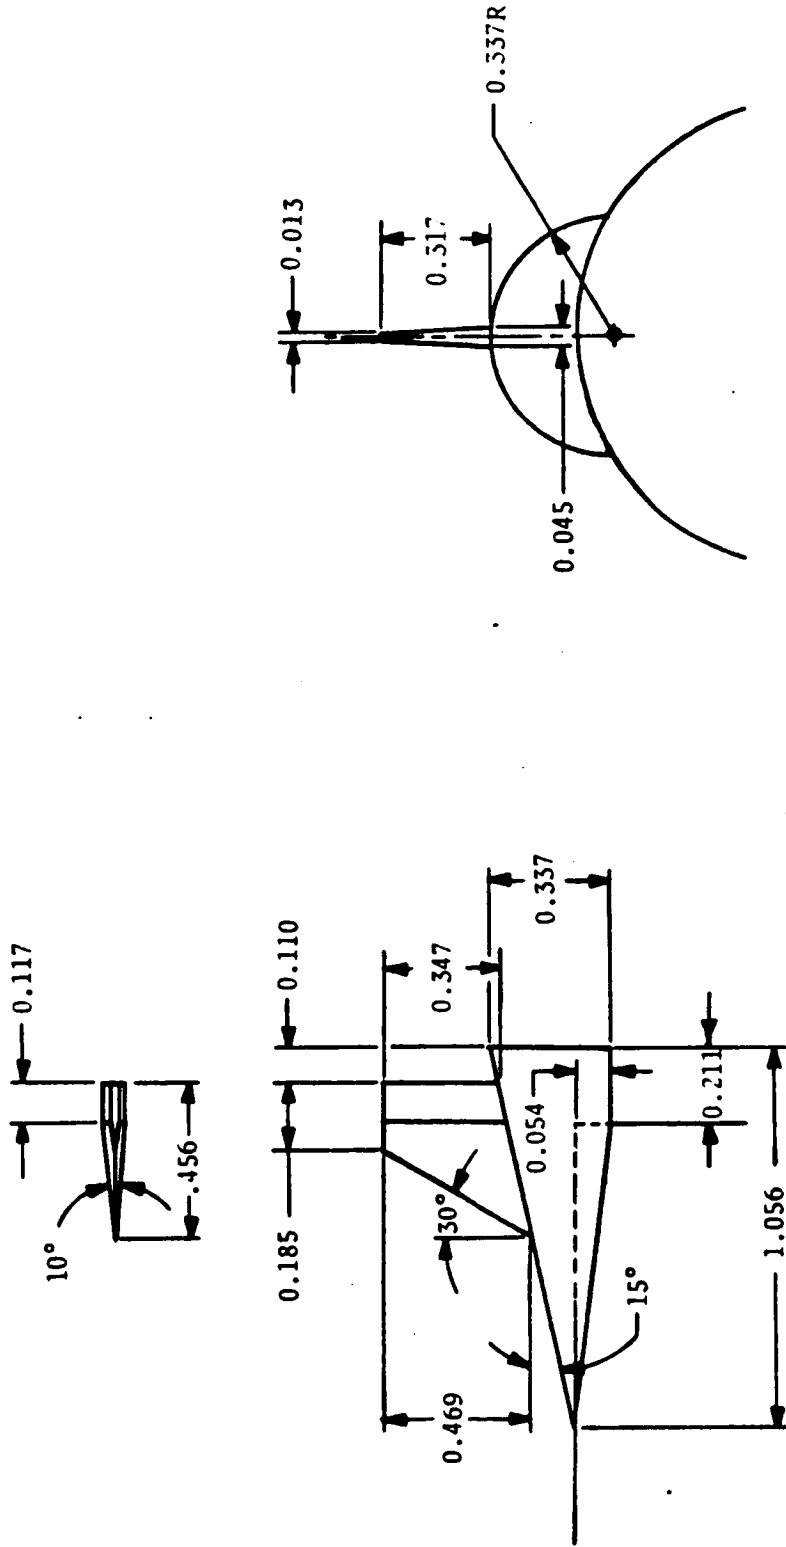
S-IC ENGINE SHROUD AND 75 SQ. FT. FIN
